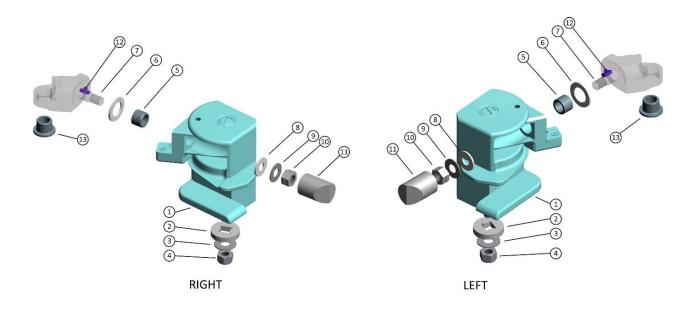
Left- and Right-Hand Shoulder Pivot Assembly
